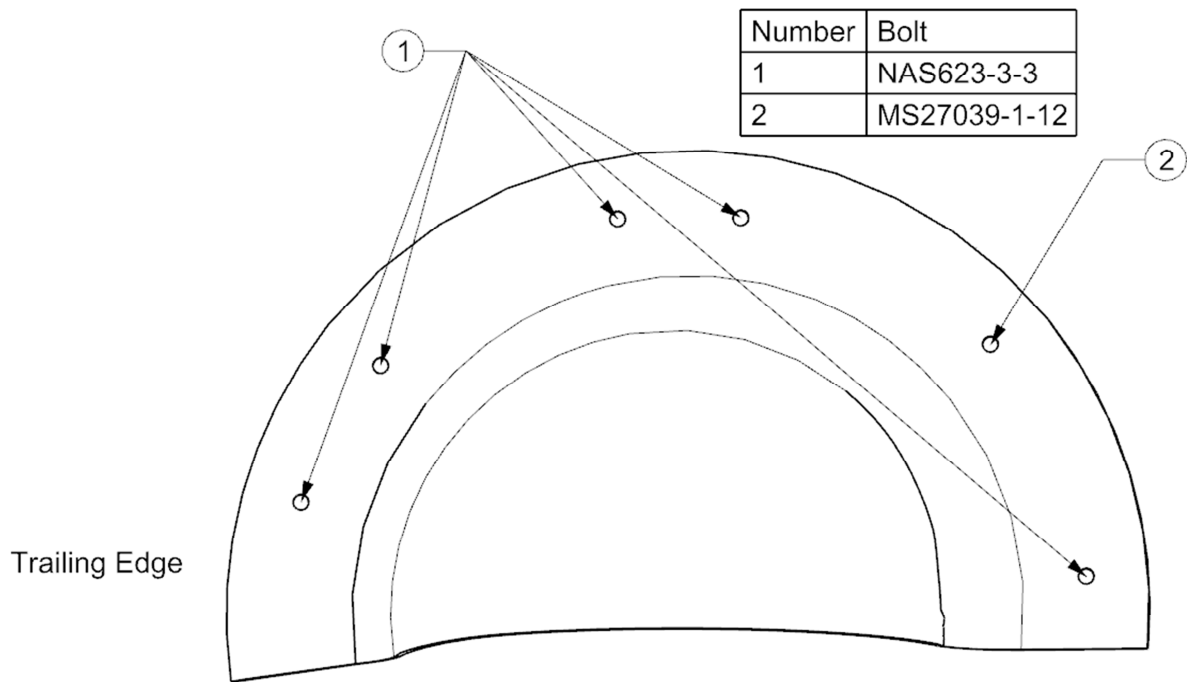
Outboard Wing Pylon Aft Lug Cover Fastener Placement
